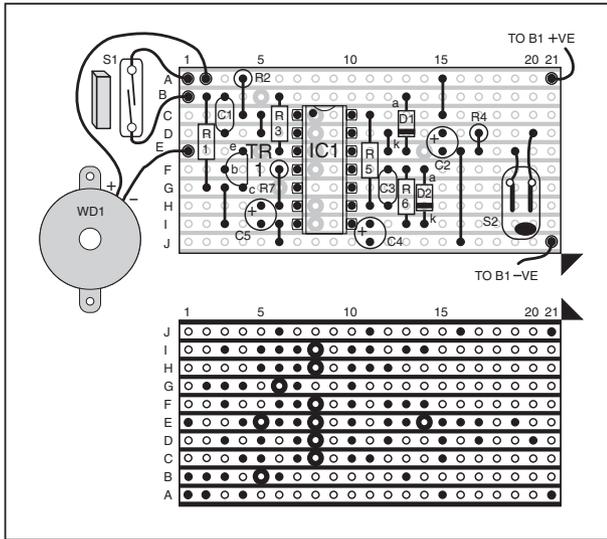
Stripboard component layout, off-board wiring and details of breaks required in the underside copper strips. The transistor pinouts are shown inset right.
